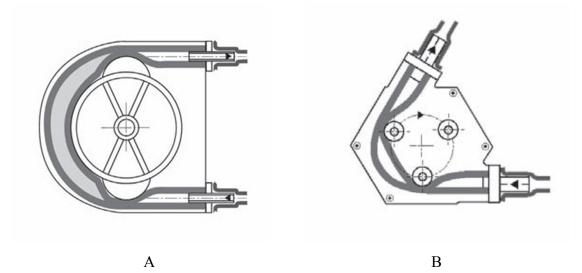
Hose pump: A - rotor with cams, B - rotor with rollers
